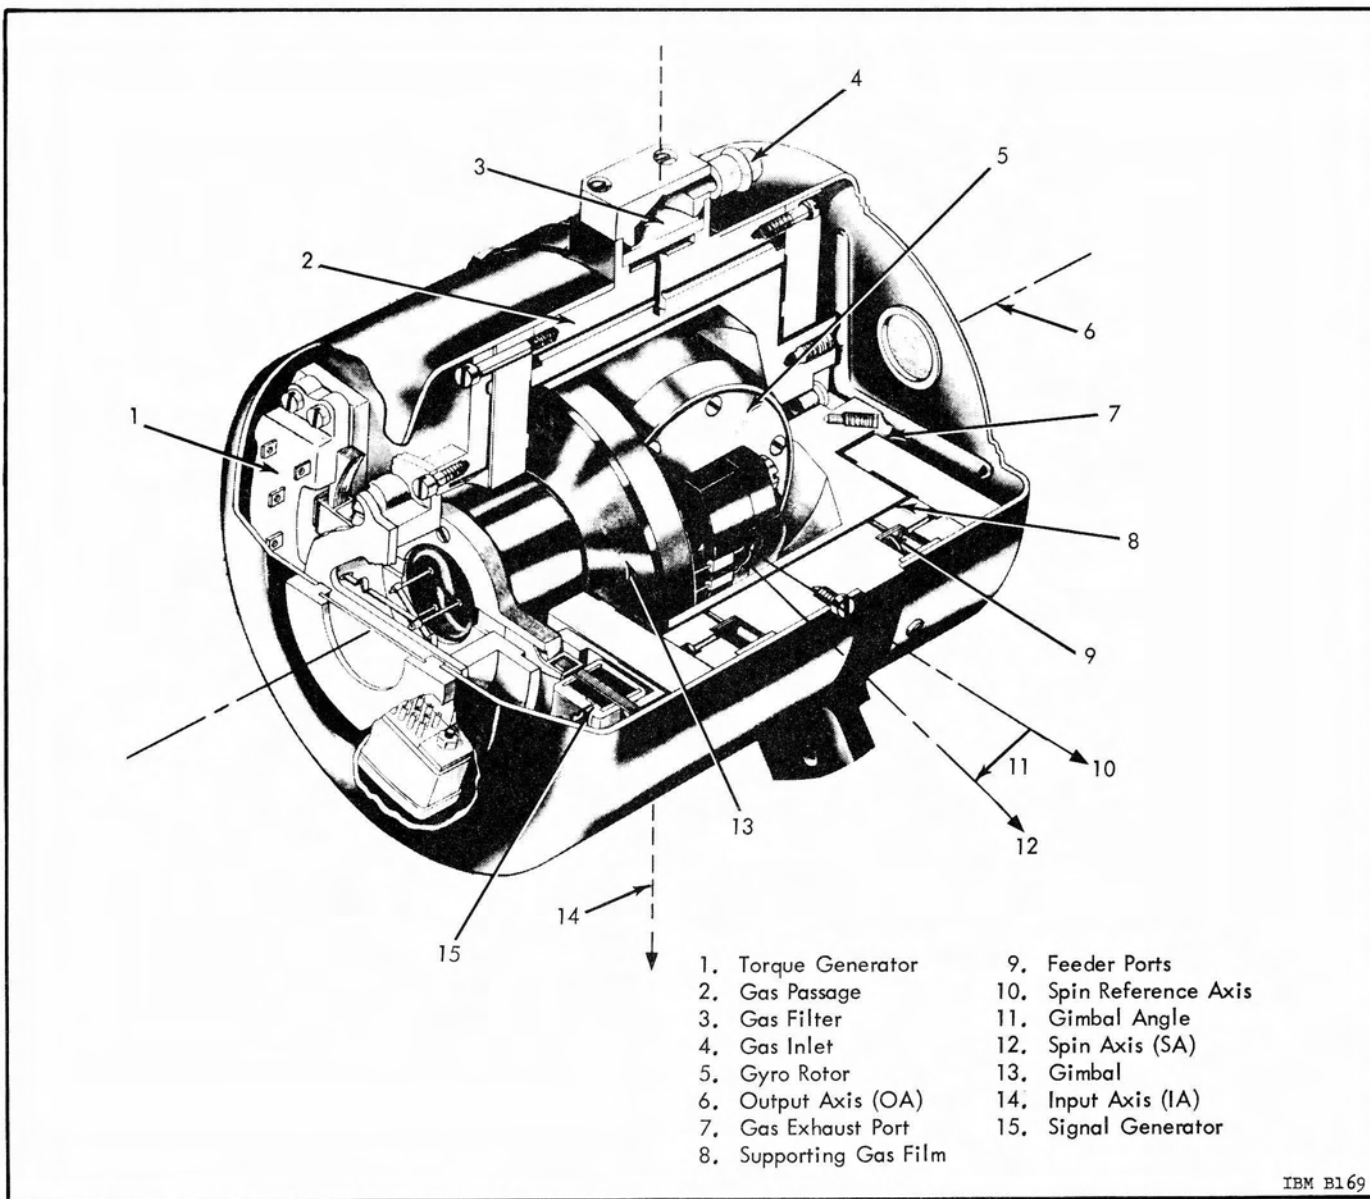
Cutaway View of a Single-axis Integrating Gyro
